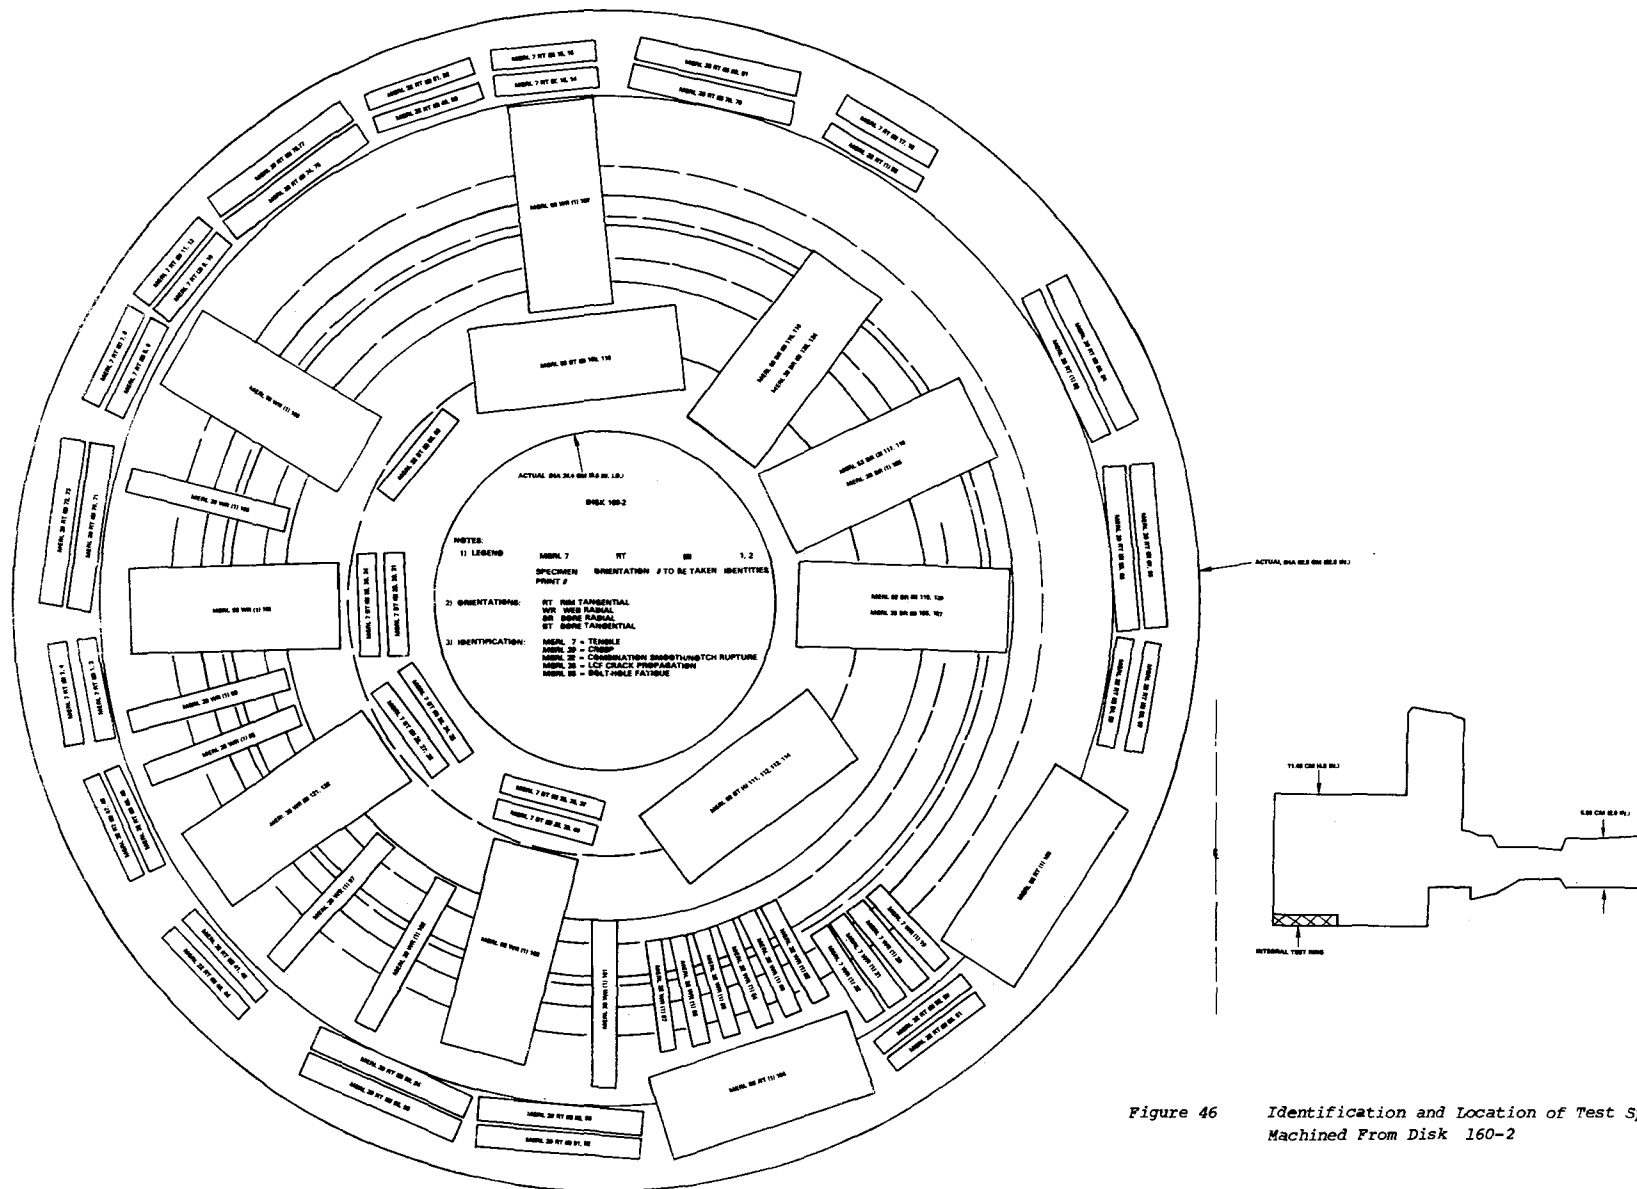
Identification and Location of Test Specimen Machined From Disk 160-2
